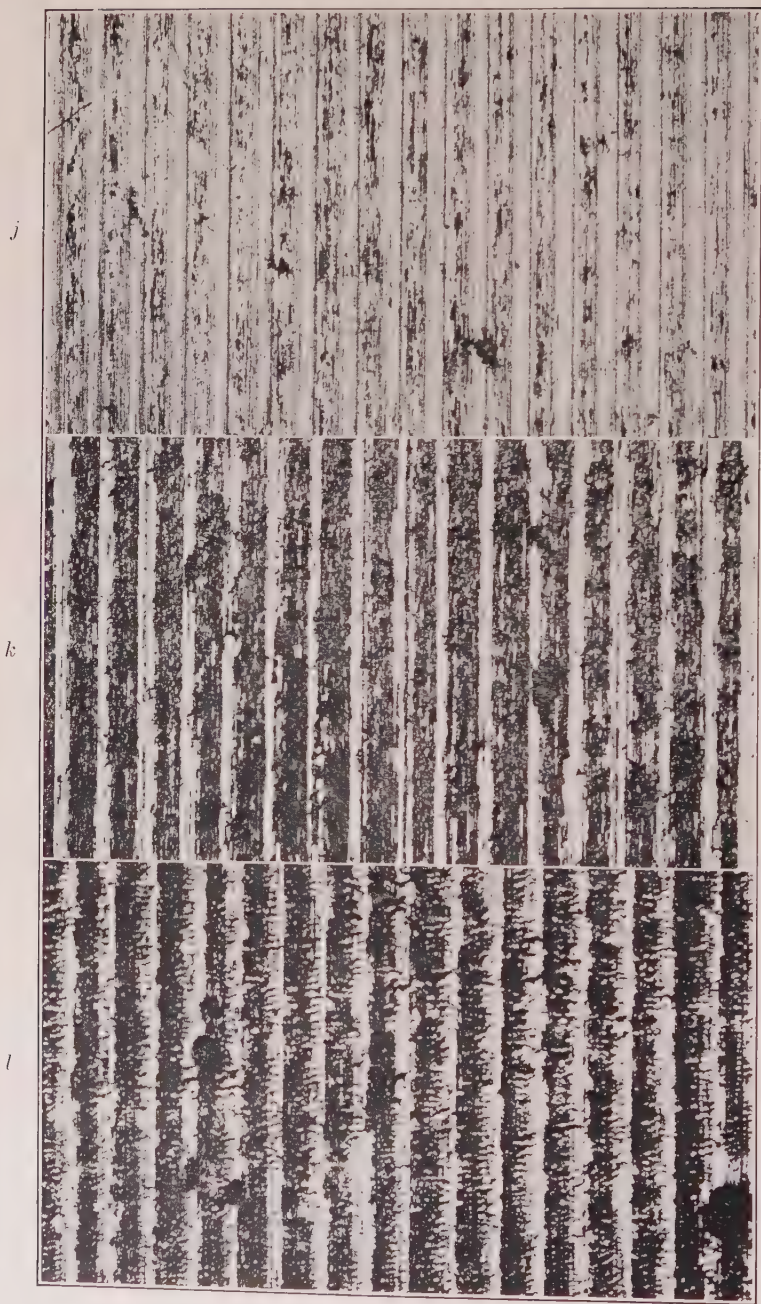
SURFACE FINISHES OF ALUMINUM ALLOYS MACHINED UNDER THE SAME CONDITIONS.—(Continued).
